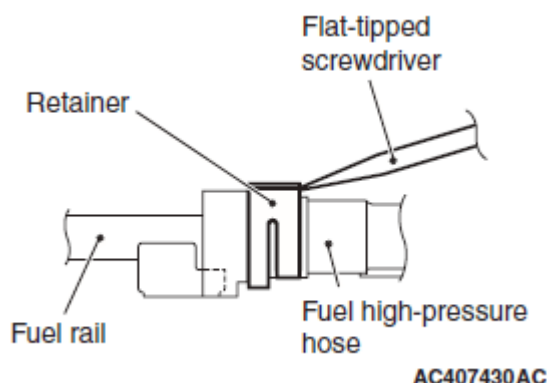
Inserting Flat-Tipped Screwdriver Into Retainer Of Fuel High-Pressure Hose Connector
